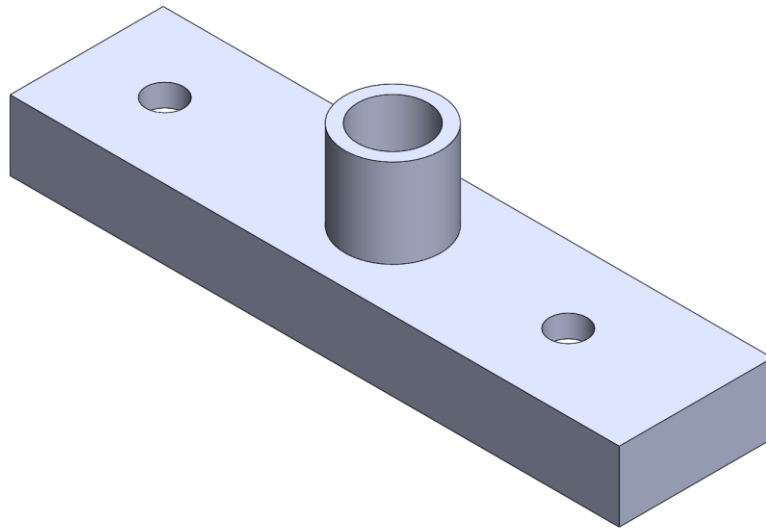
Top lid assembly. The pneumatic fitting, nozzle and manometer are not shown.
